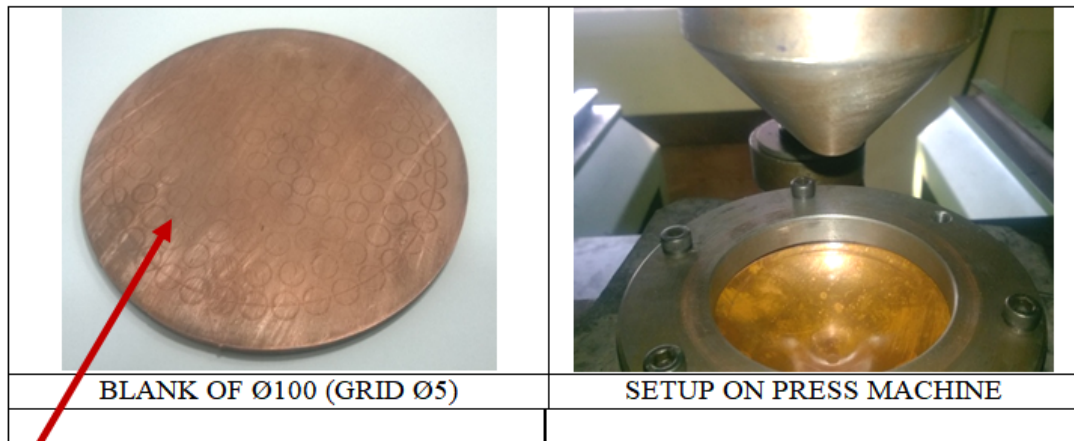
Die assembly and Punch for forming of Conical Shape
